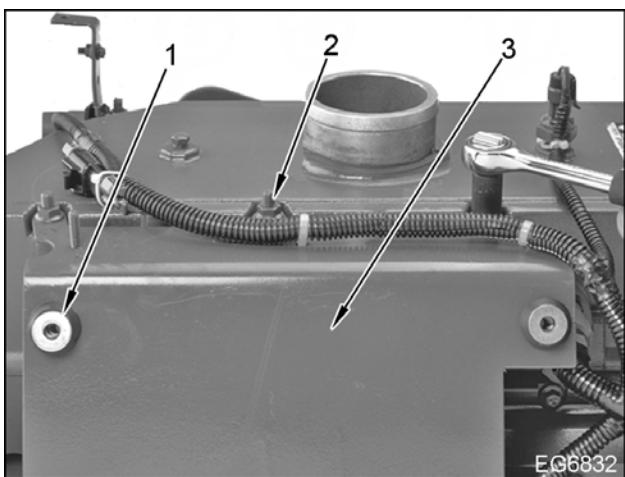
ECM bushings, pins and nuts (front mount ECM)
